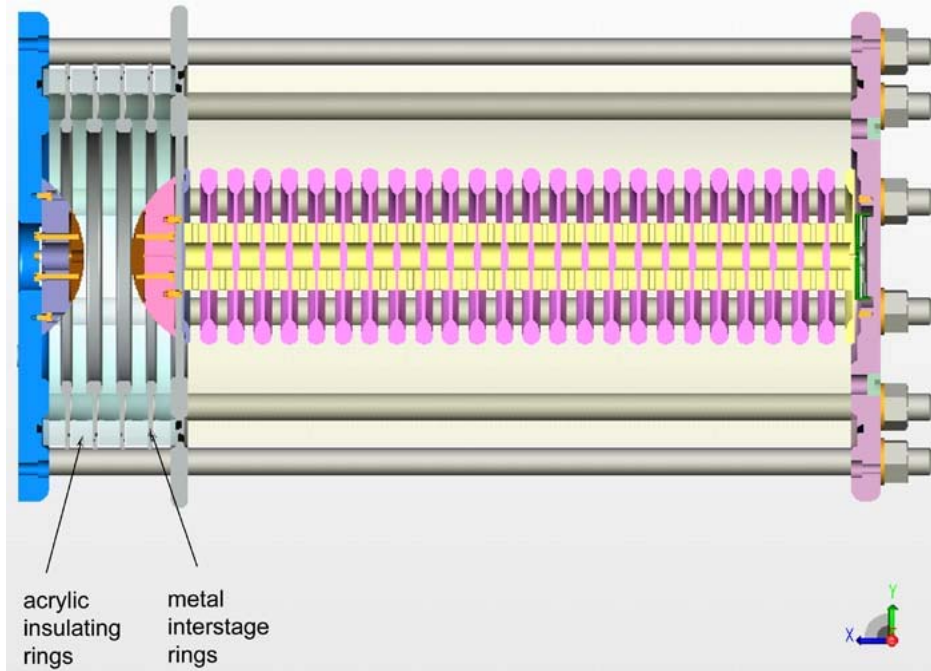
The segmented switch. The trigger section is built from small insulators cut from tube or sheet, and metal grading rings with o-rings. The trigger section would be the first test of the segmented concept.
